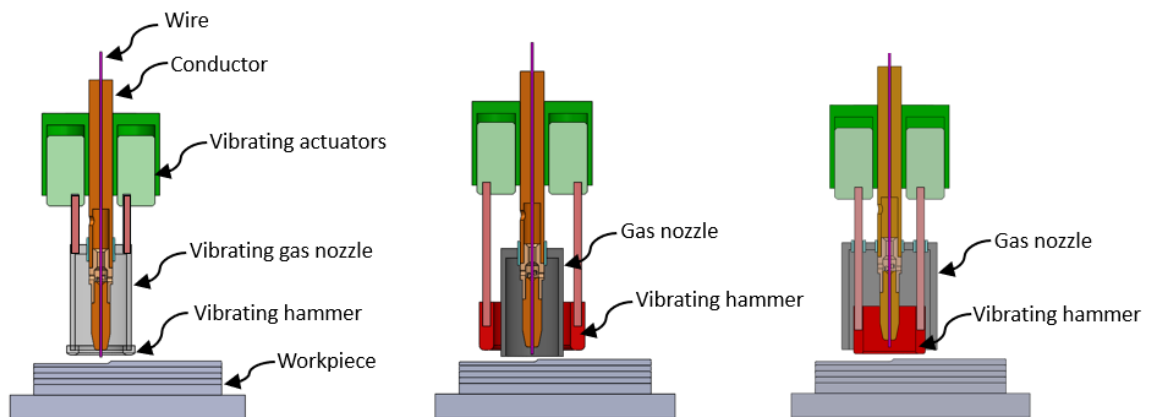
CAD model of the hammer place option: (a) gas nozzle as a hammer; (b) hammer outside of the gas nozzle; (c) hammer inside the gas nozzle
